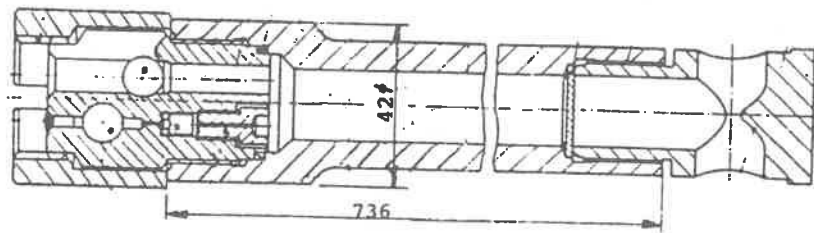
SECTION OF SHOCK-WAVE BREAKER
